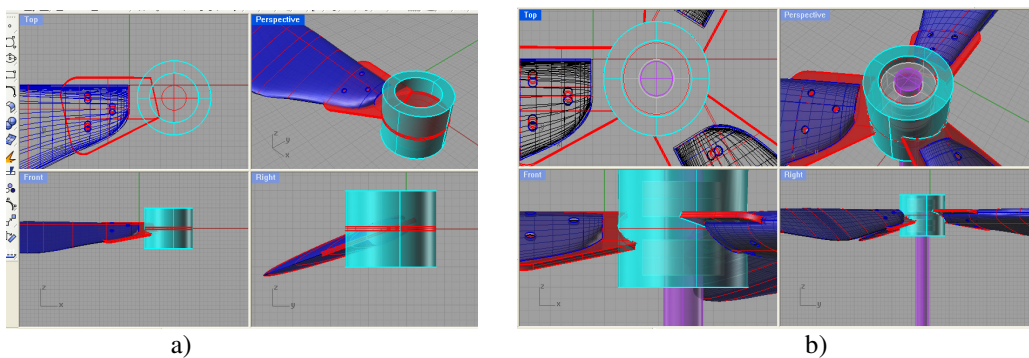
a) Rotor Shaft. b) Rotor with cylindrical beam, radial bearings, rotor shaft, blades and yoke plates
